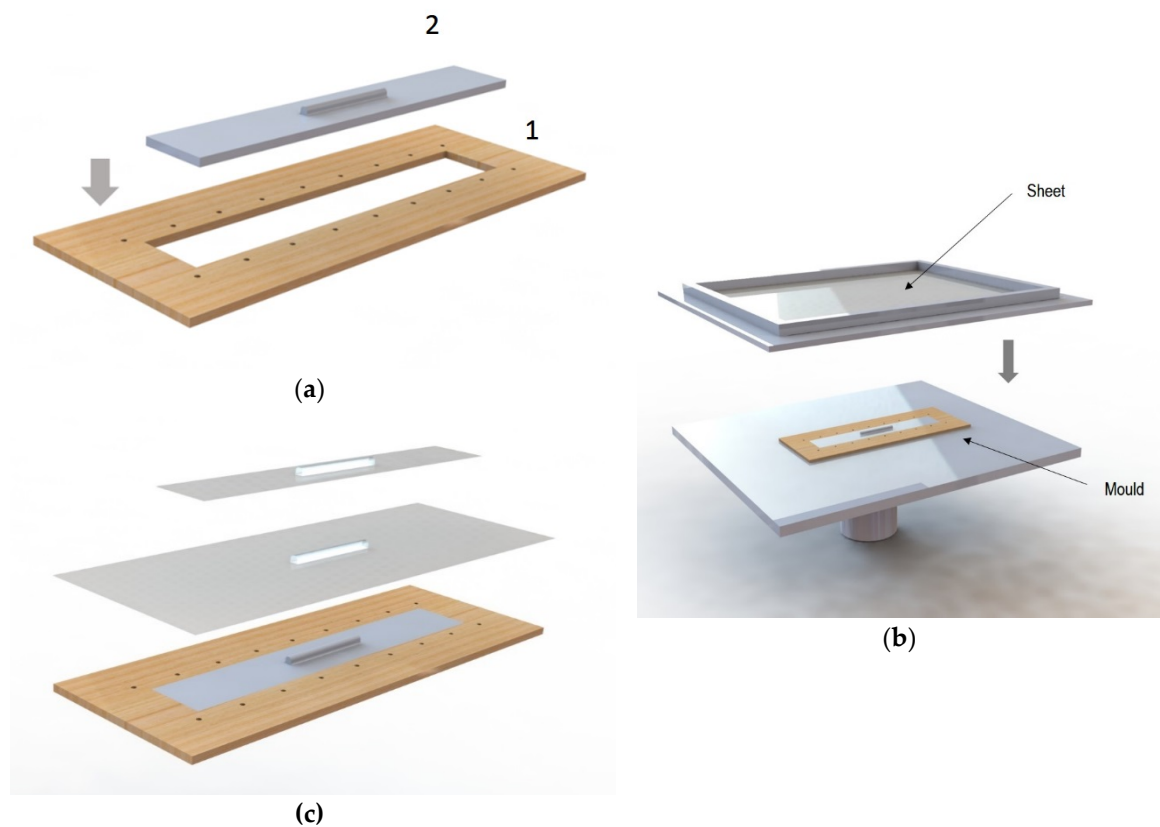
Thermoforming of specimens for tensile tests: a) Hybrid mould; b) Thermoforming of the sheet with hybrid mould to obtain the thermoformed sheet specimen; c) Procedure for obtaining the thermoformed specimen.
